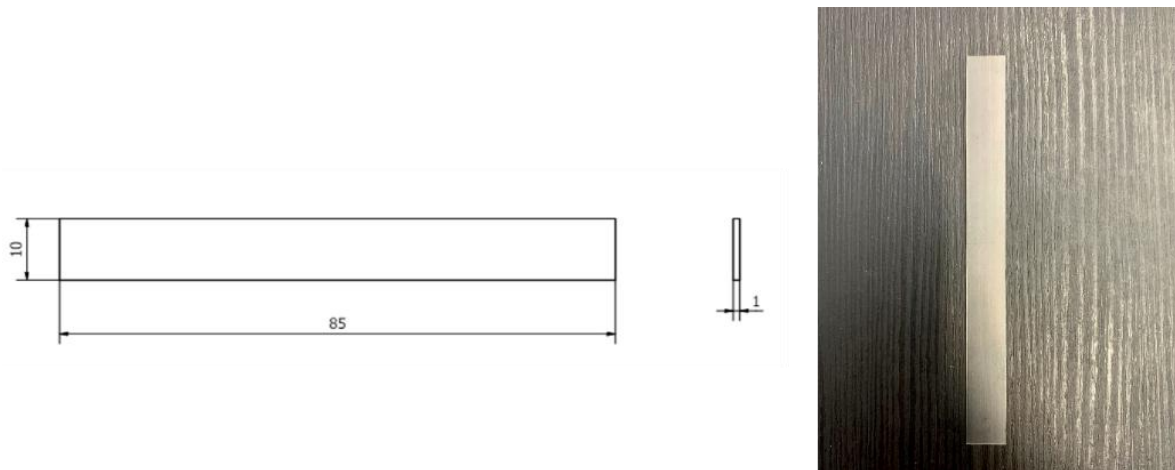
Engineering drawing and picture of the stripe PU-SMP specimen.
